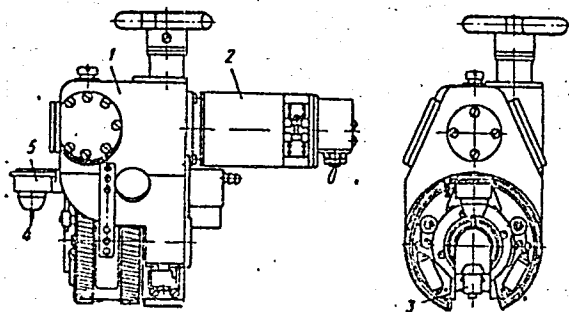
АГН-8-28М (AGN-8-28M) welding head.
